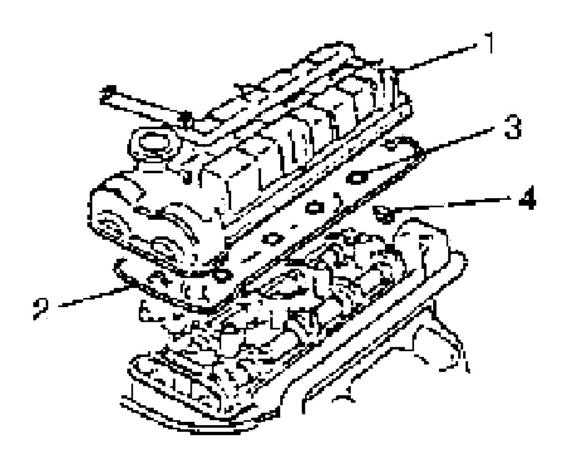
Installing Cylinder Head O-Rings & Cover Gasket Courtesy of SUZUKI OF AMERICA CORP.
